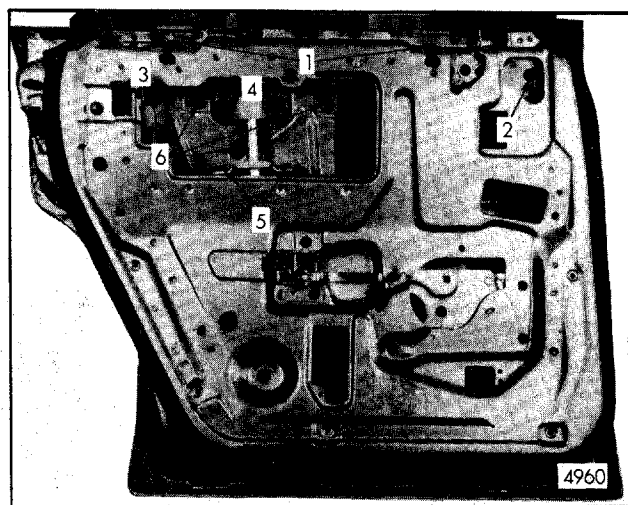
Rear Door Window Removal and Adjustments - "A-29, 35" Styles
